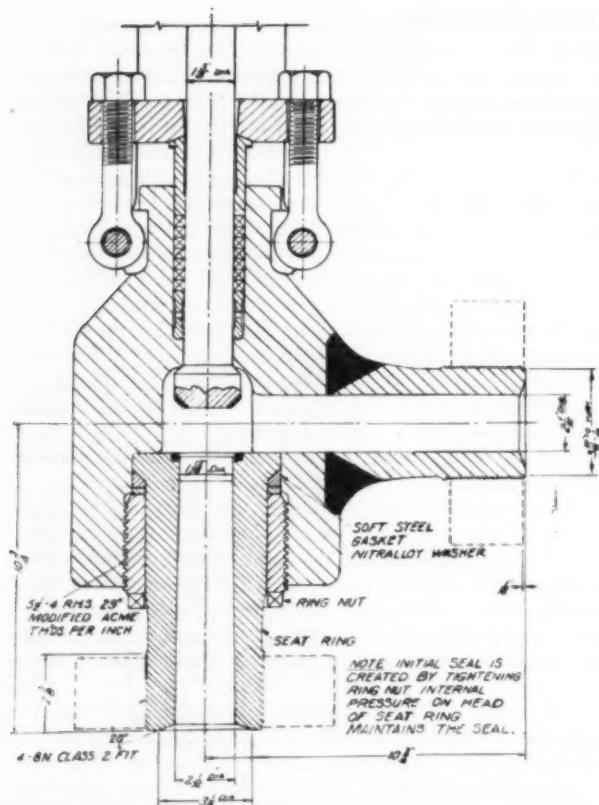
HIGH-PRESSURE SHUTOFF-VALVE ASSEMBLY
